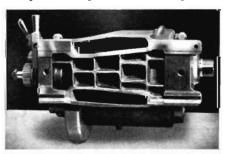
Bottom View of Headstock Showing Rigid Cross-Ribbed Construction BRONZE
